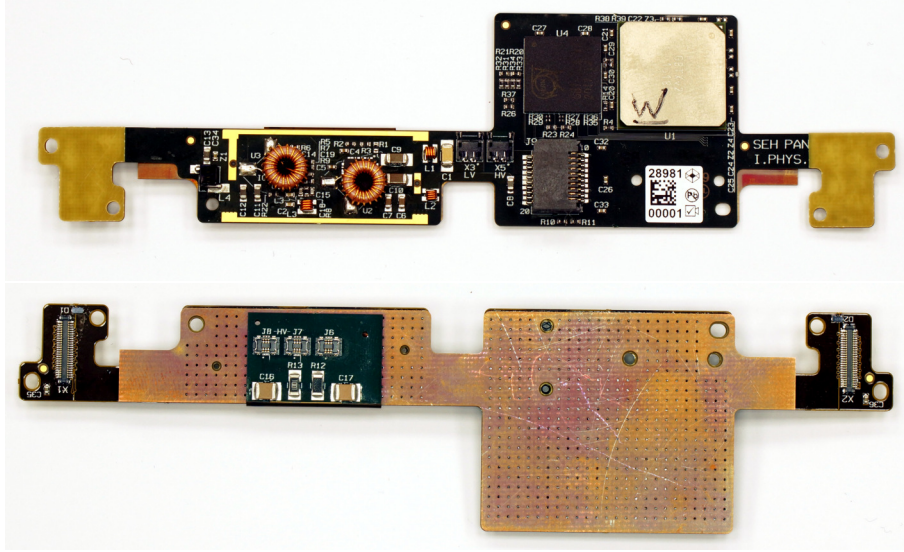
Pictures of the top and bottom side of a Service Hybrid v3.1 prototype. The DC-DC converter shield is not assembled.
